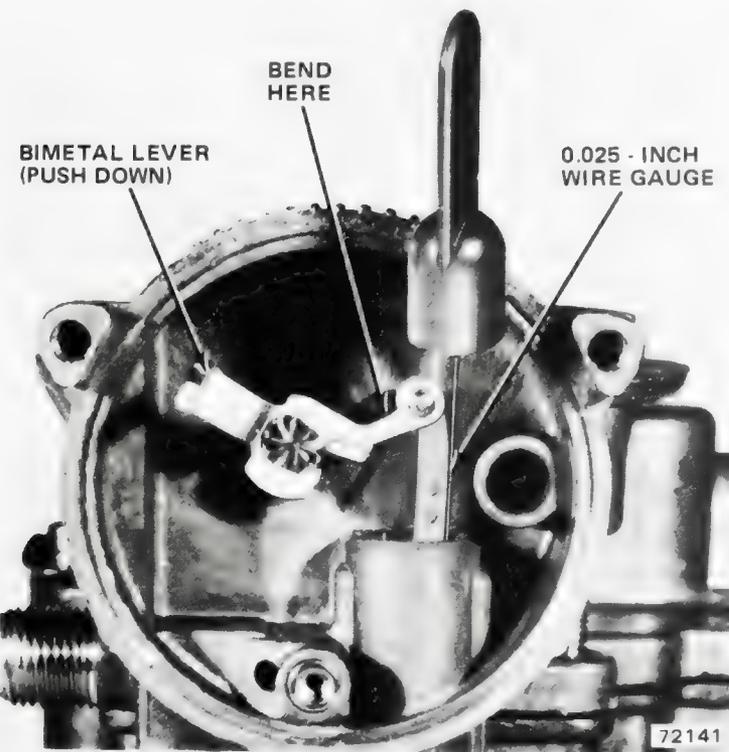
J-54 Initial Choke Valve Clearance Adjustment
